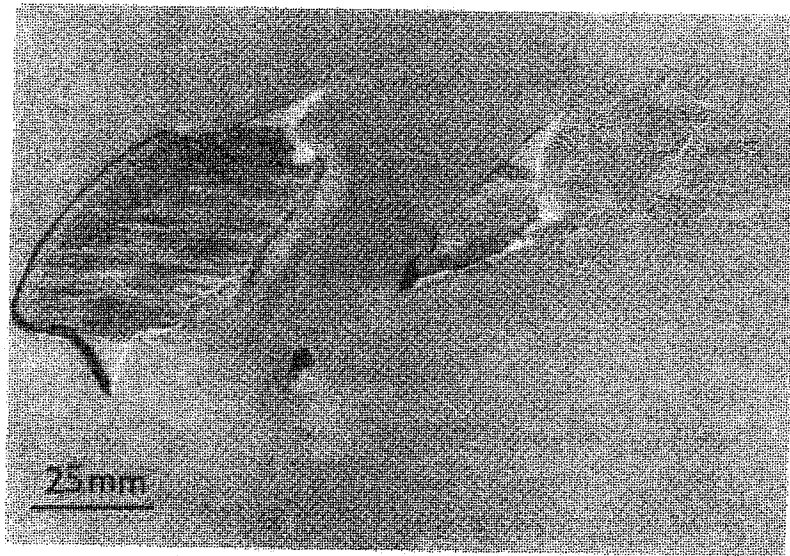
The tearing damage on a rolling aluminum cylinder [Ref. 14].
